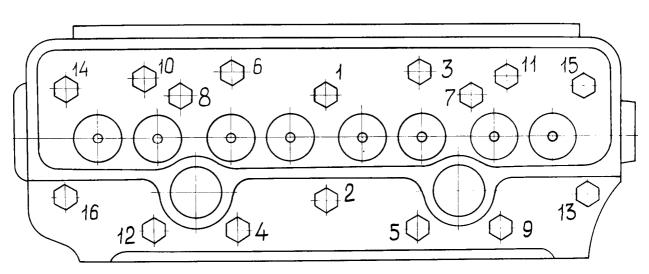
Diagram of the order of tightening the bolts fastening the cylinder head.
